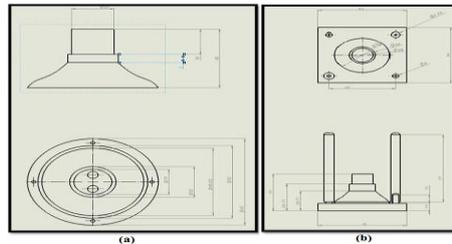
Orthographic Projection of (a) Component Body and (b) Mould Die
